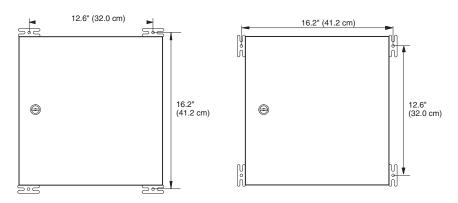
Small NEMA 4 Housing - Installation Dimensions
